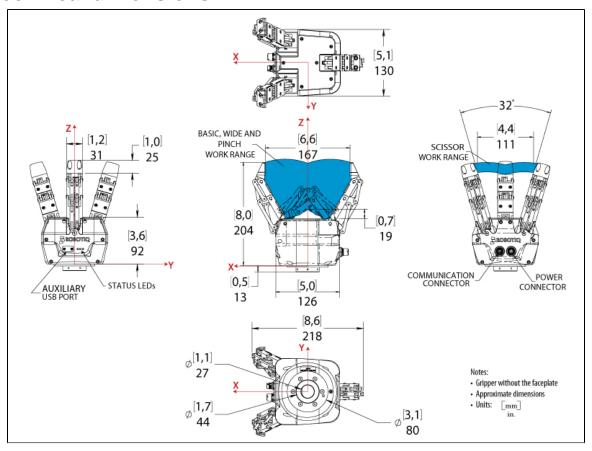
Robotiq Adaptive Gripper model S technical dimensions.
